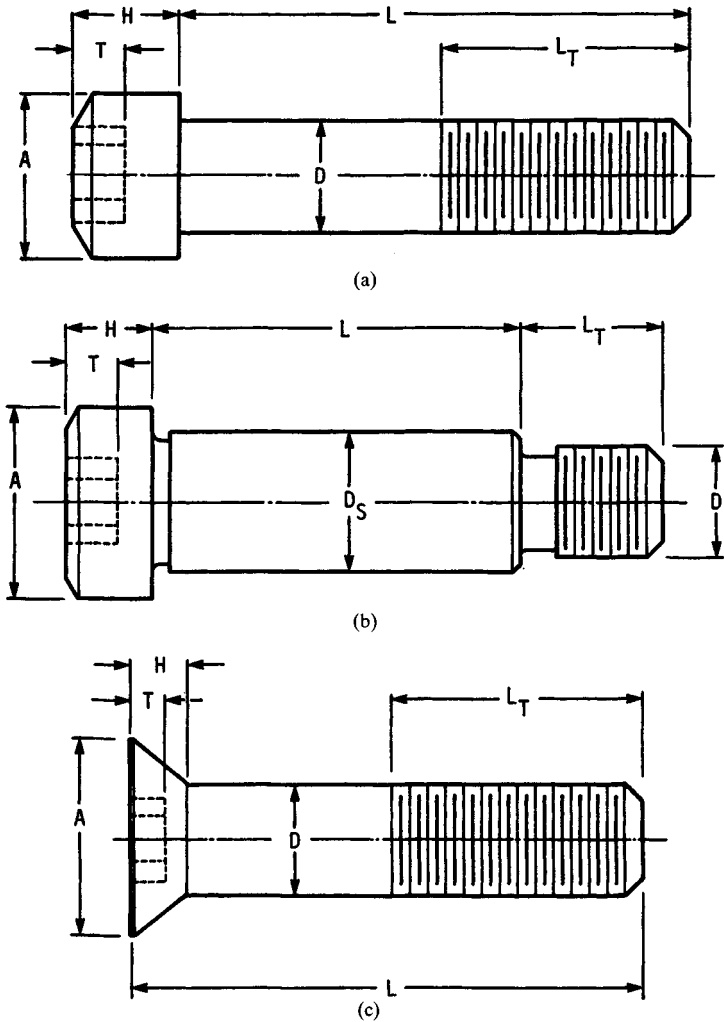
Socket screws. (a) Cap screw; (b) shoulder screw; (c) flat-head screw.
